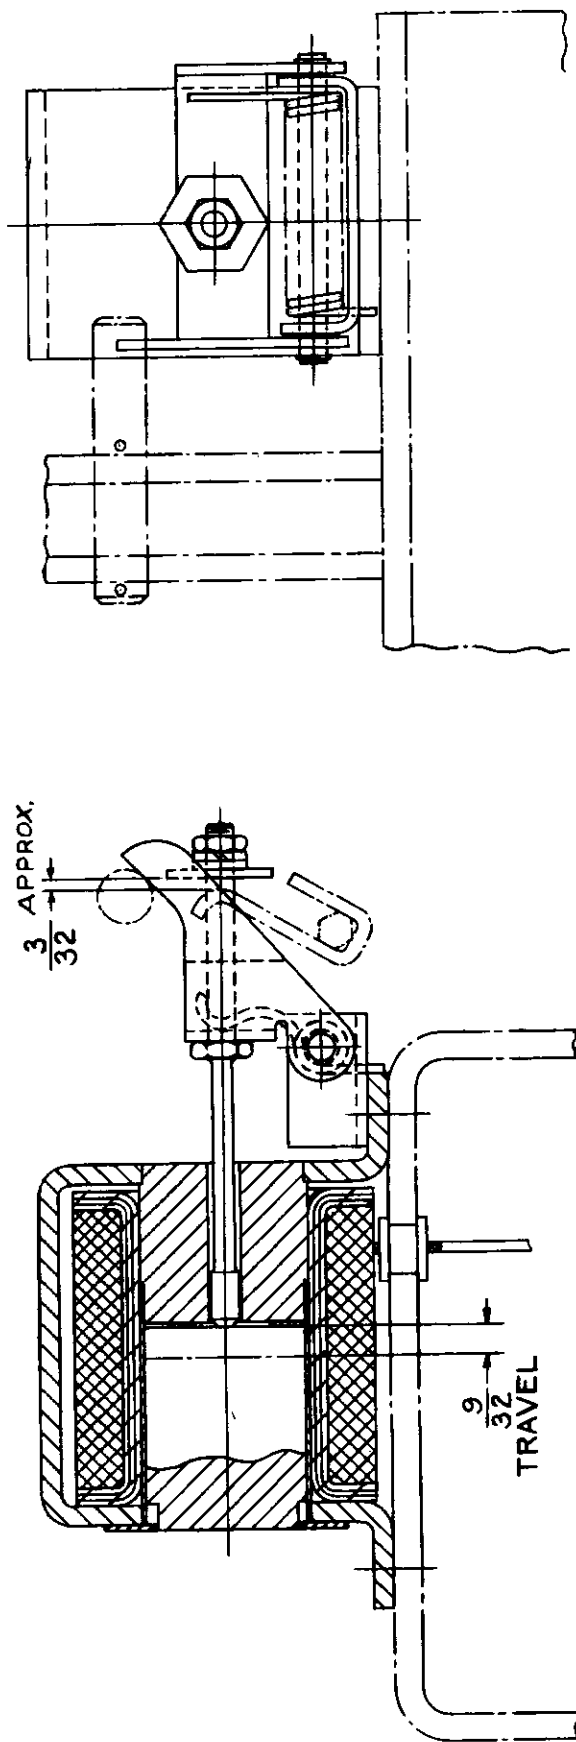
ELECTRICAL LOCK-OUT ATTACHMENT - CONSTRUCTION DETAILS
